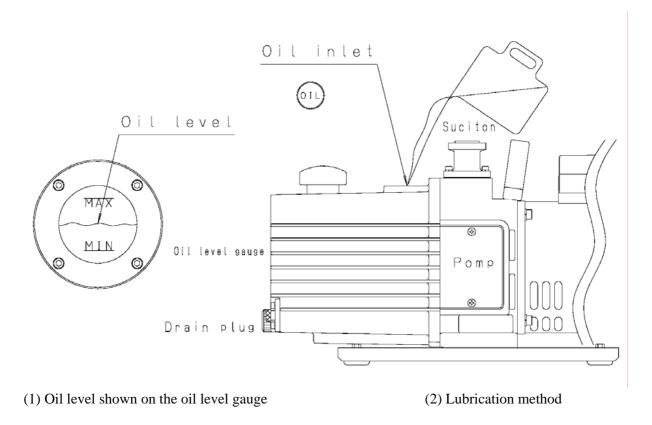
Lubrication of the oil sealed rotary vacuum pump
